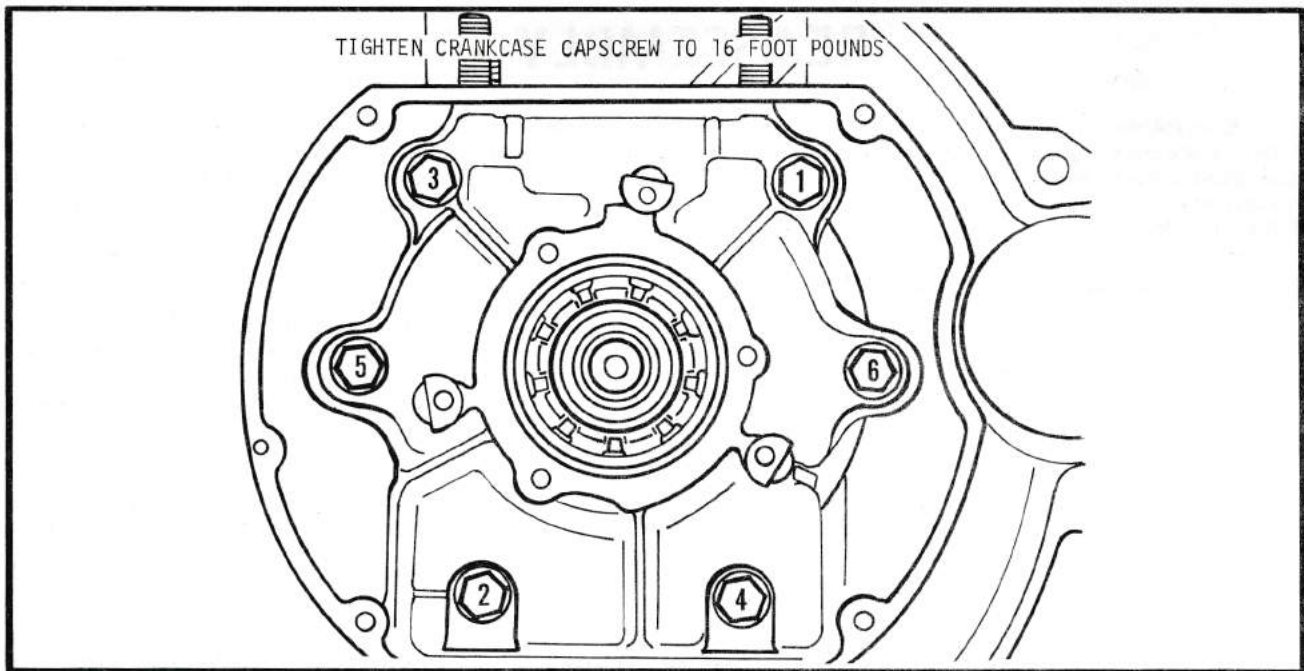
CRANKCASE CAPSCREW TIGHTENING SEQUENCE AND TORQUE SPECIFICATIONS
